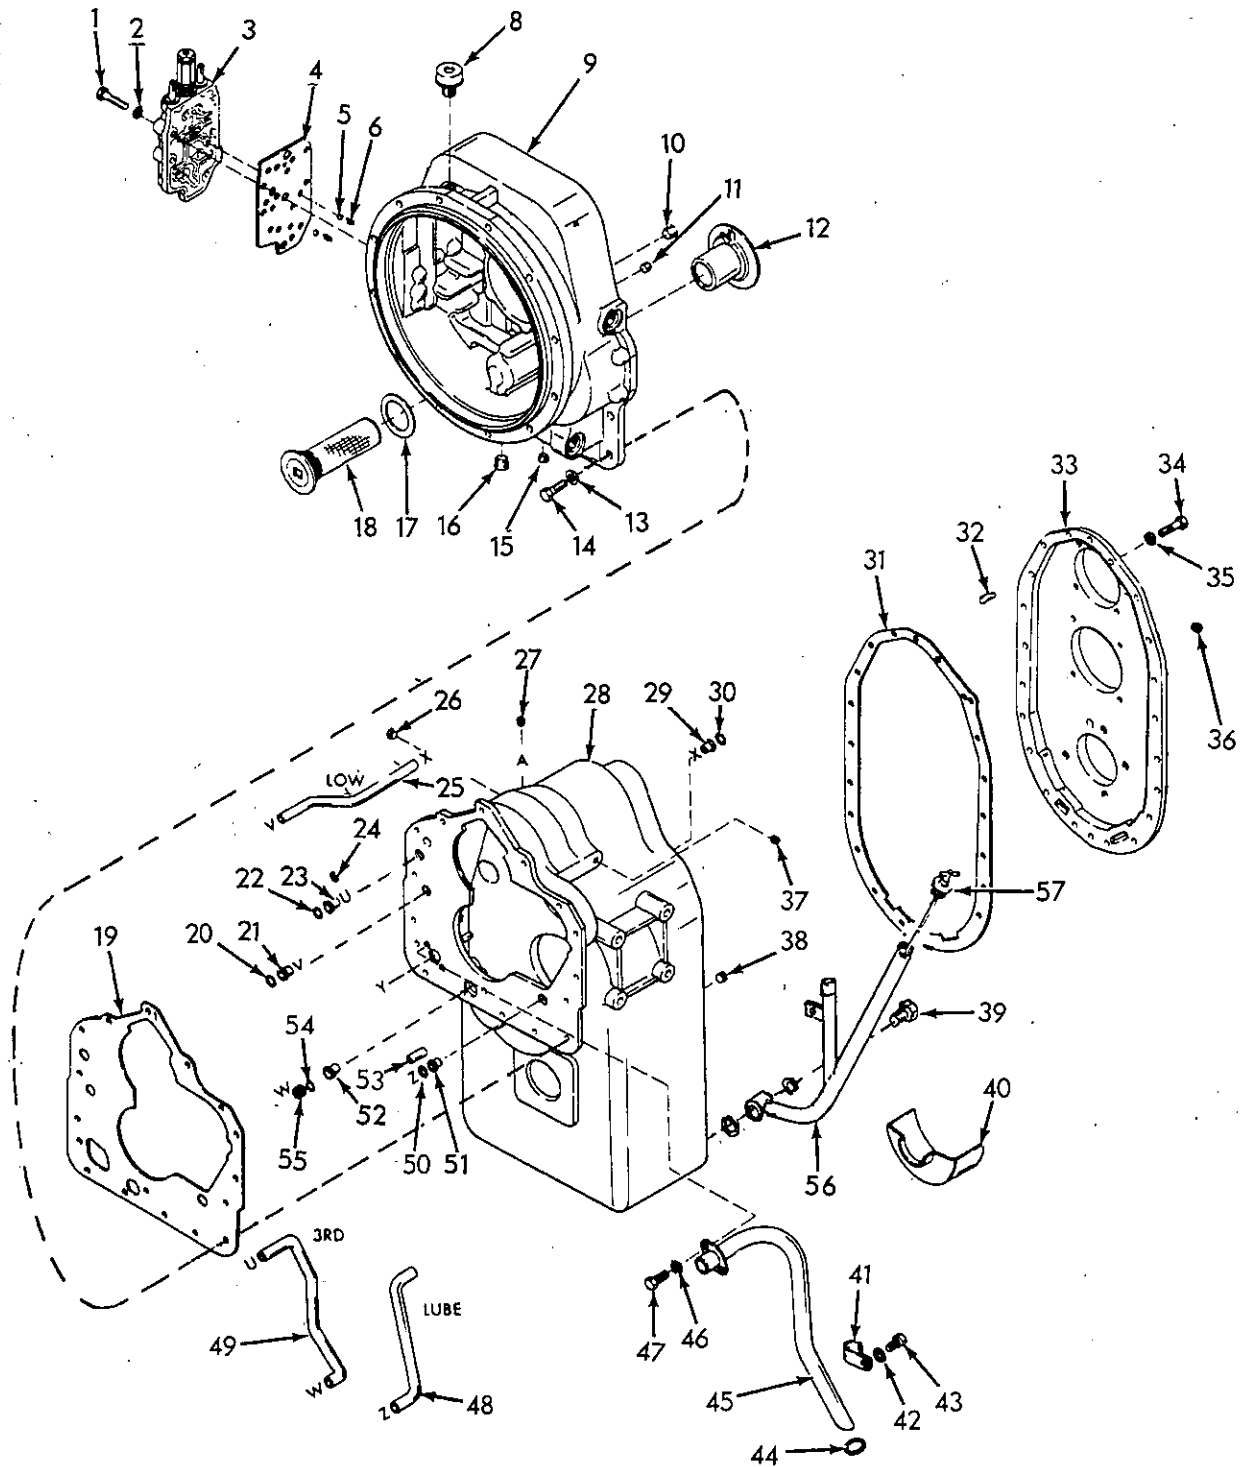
CONVERTER & TRANSMISSION HOUSING GROUP
